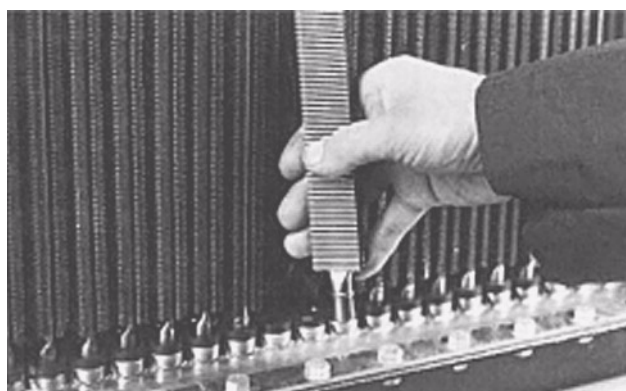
ANGLING TUBE DURING REMOVAL
